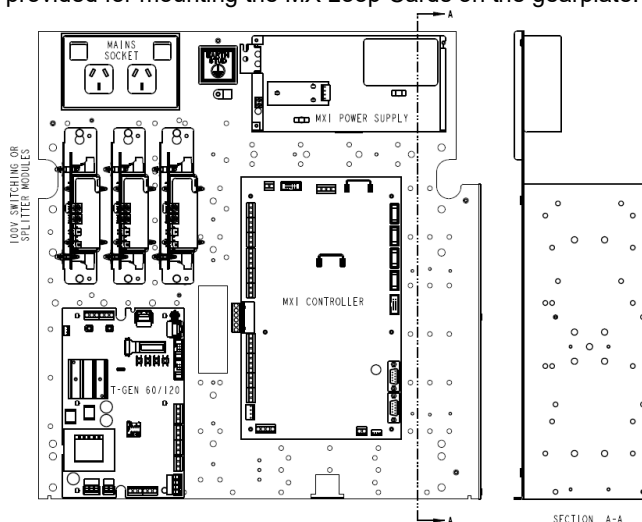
Mounting T-Gen2 on MX1 gearplate
